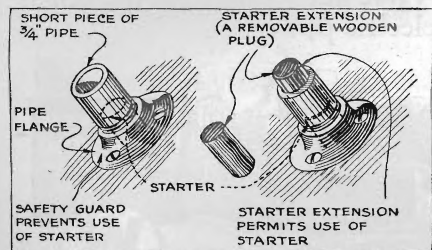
A pipe flange fitted over starter, with plug to work it, makes car safe for children.
